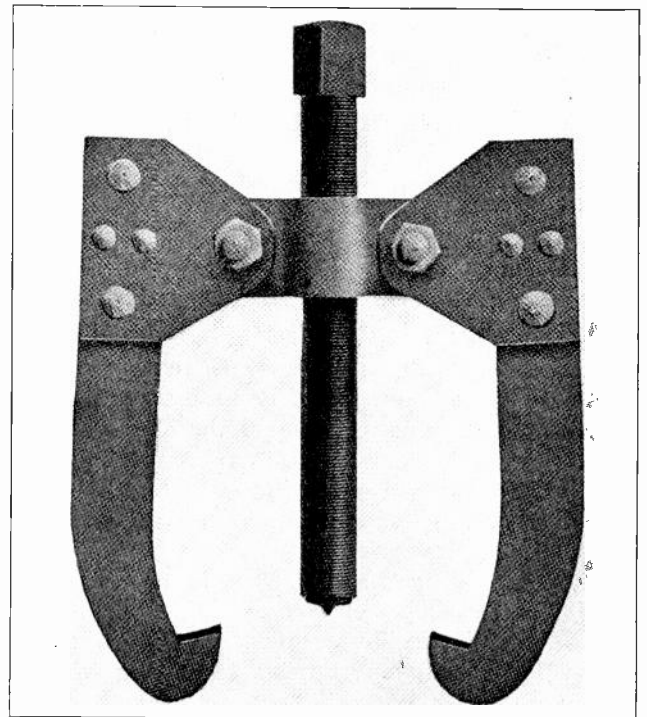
Simple gear or pulley remover, commonly called a gear puller. Tight fitting gears and pulleys can be removed from shaft ends with such a device.
